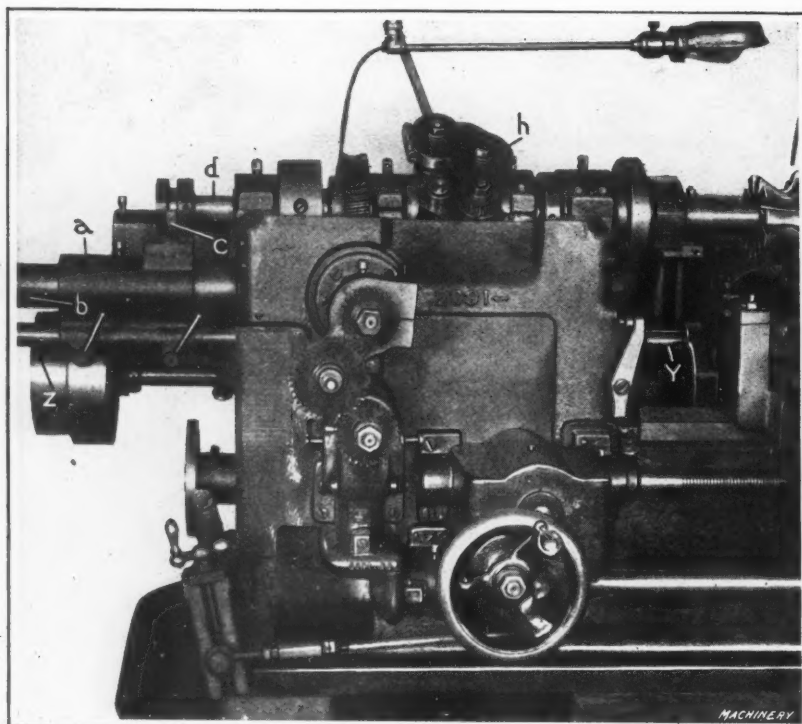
Close-up View of Mechanism for transmitting Drive to Relieving Slide and for obtaining Angular Adjustment of the Milling Cutter
